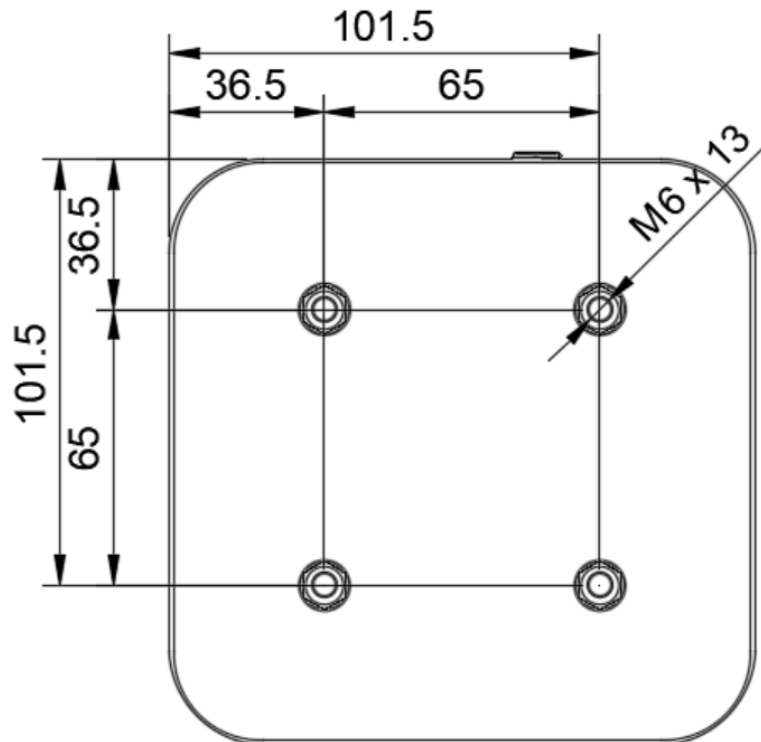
KY-LOC 1D.02.01 Mechanical Drawing (Back View)
